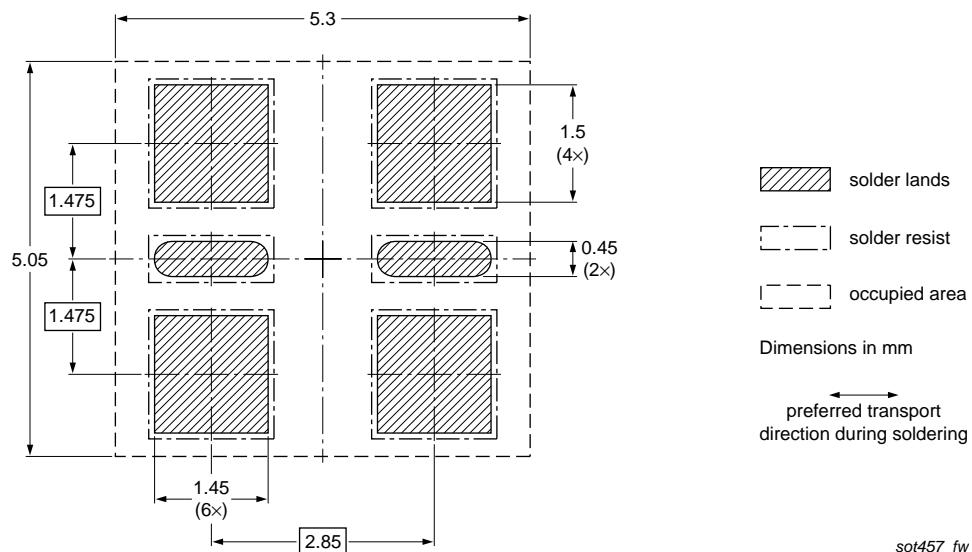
Wave soldering footprint for SOT457 (TSOP6)
